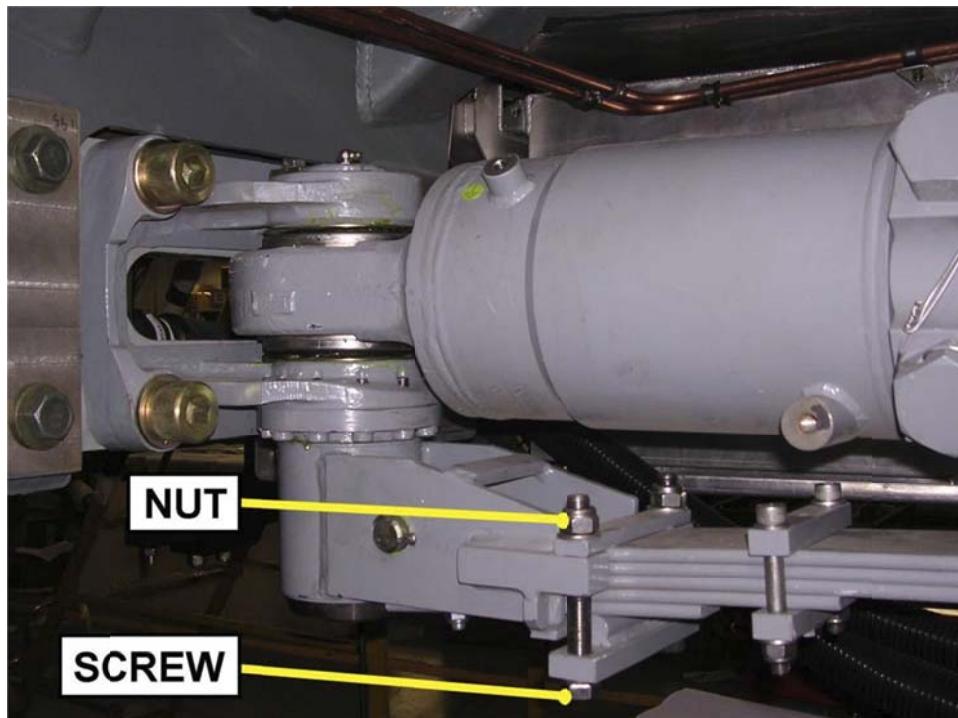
MECHANICAL COUPLER HEAD - DIMENSION "A" ADJUSTMENT
